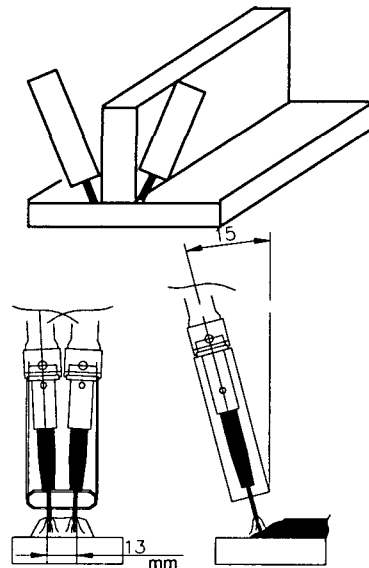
Torch arrangement of 1 Pool-twin FCAW method
